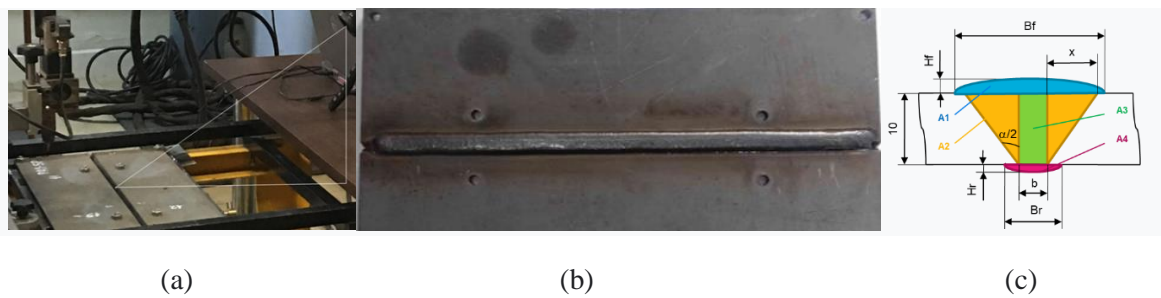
Input data from experiments: (a) experimental stand for plates welding; (b) welded seam; (c) theoretical section of welded seam
